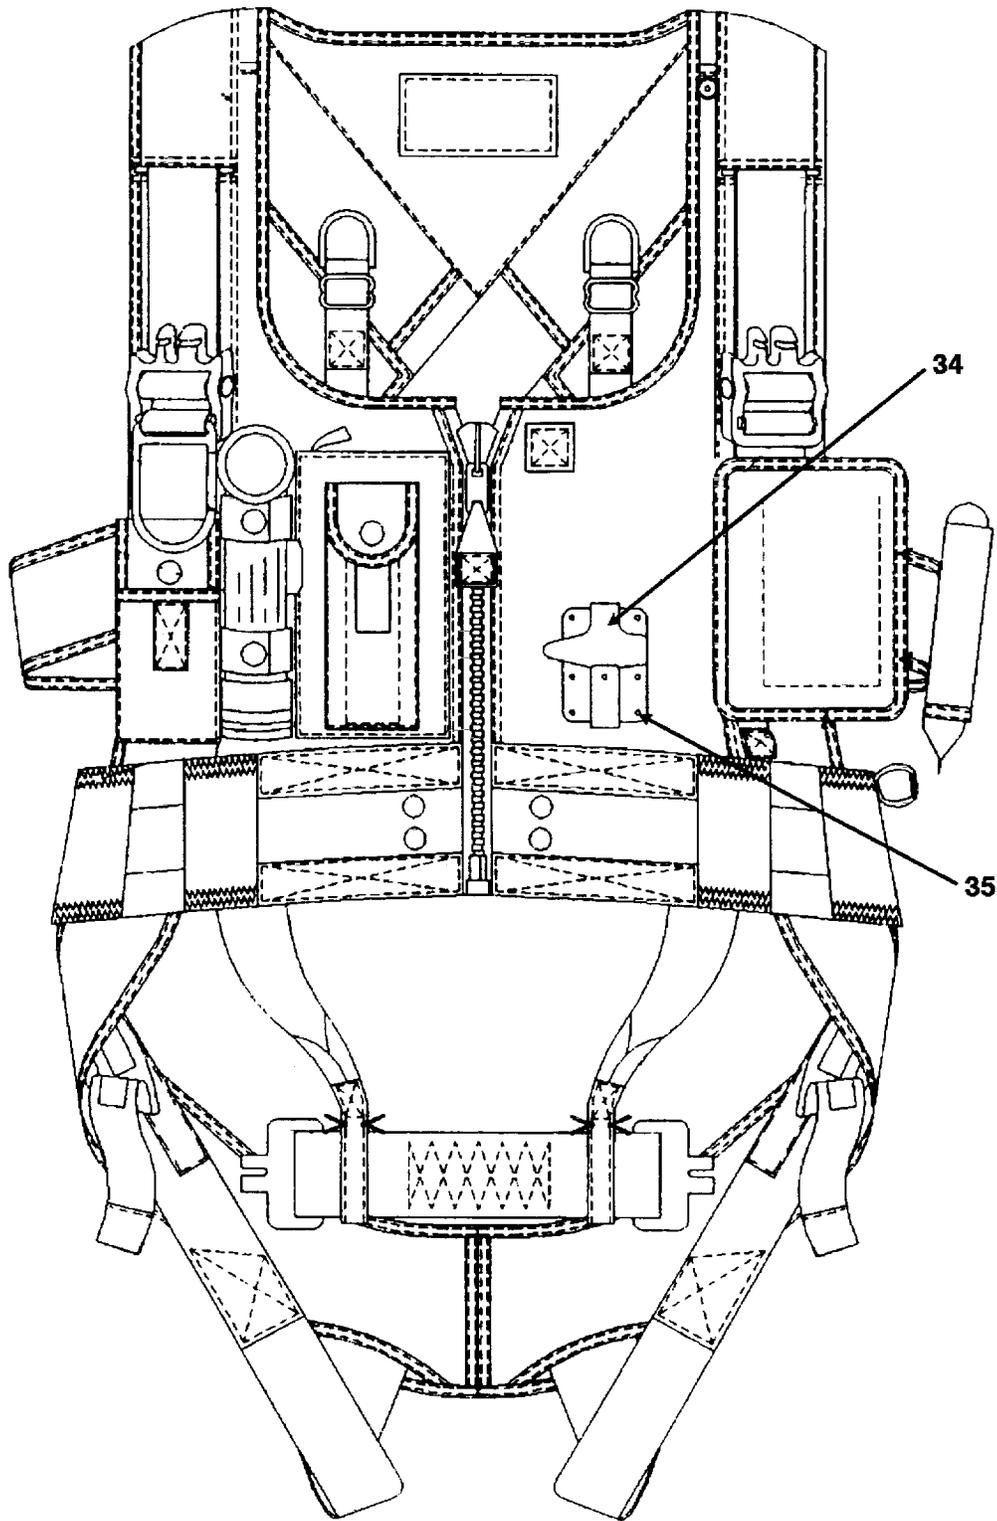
PCU-33/P Parachute Restraint Harness Assembly (Sheet 8 of 11)
